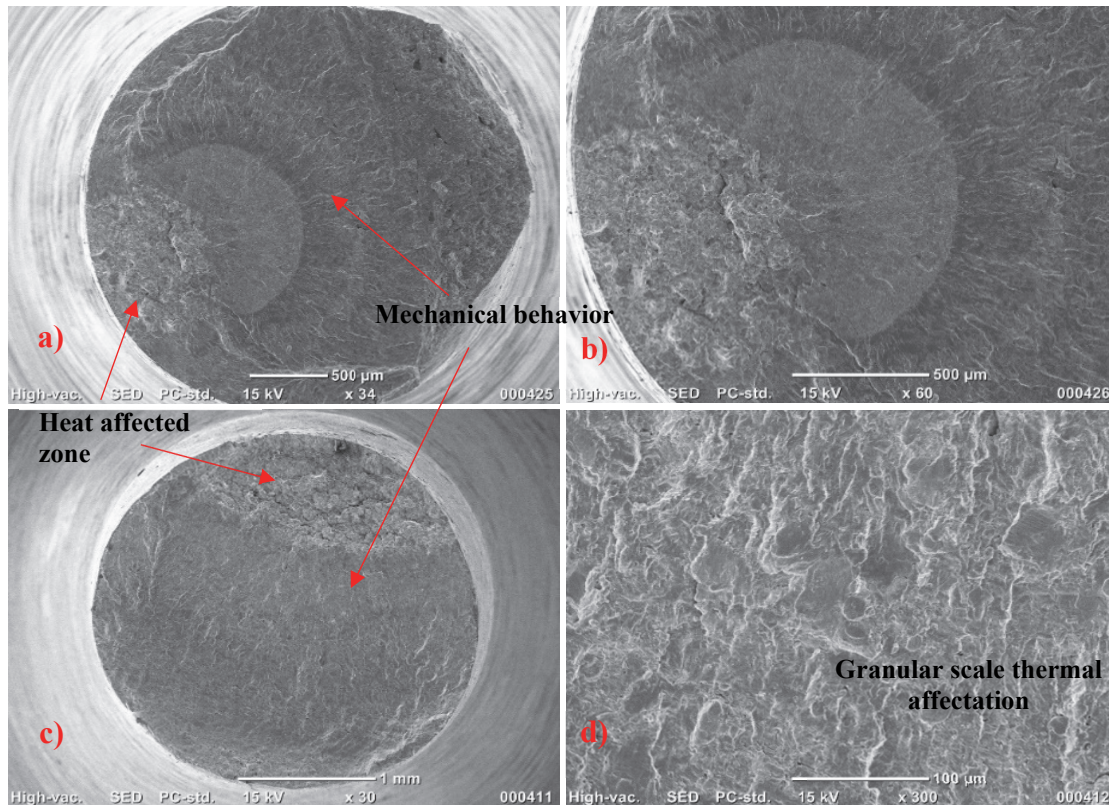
Inspection of fracture zones using SEM (Scanning Electron Microscopy) in specimens at 20 v: a) and b), stainless steel 316; c) and d), stainless steel 304.
